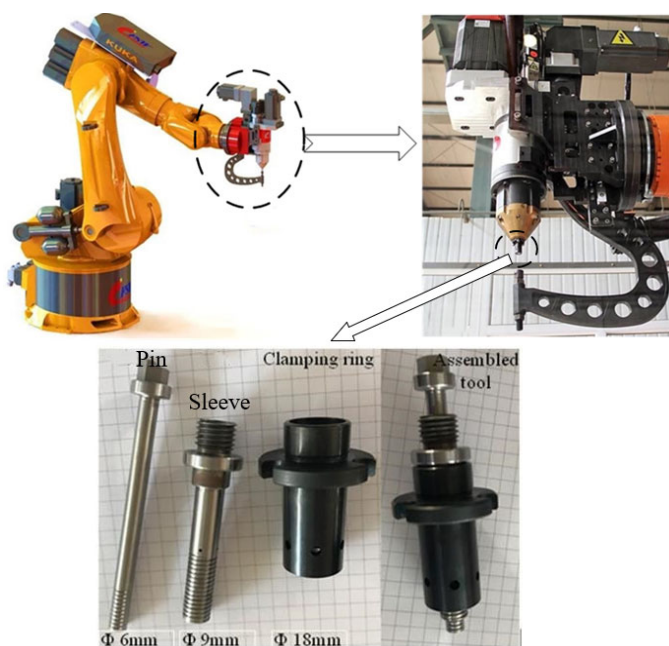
Refill FSSW robot equipment and welding tool
